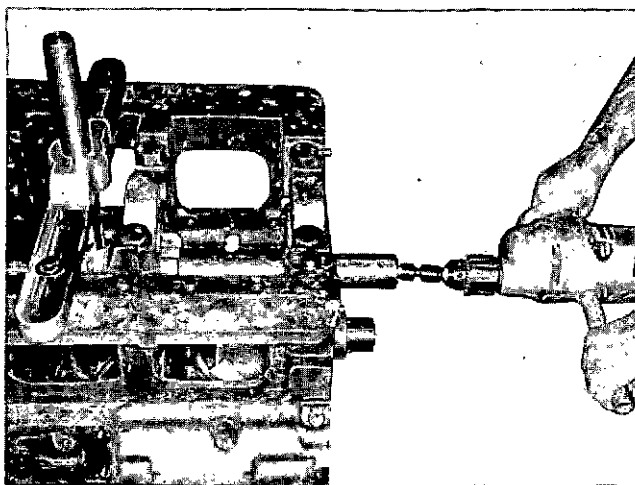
, V40190. Boring main bearing journal with ST-1177
